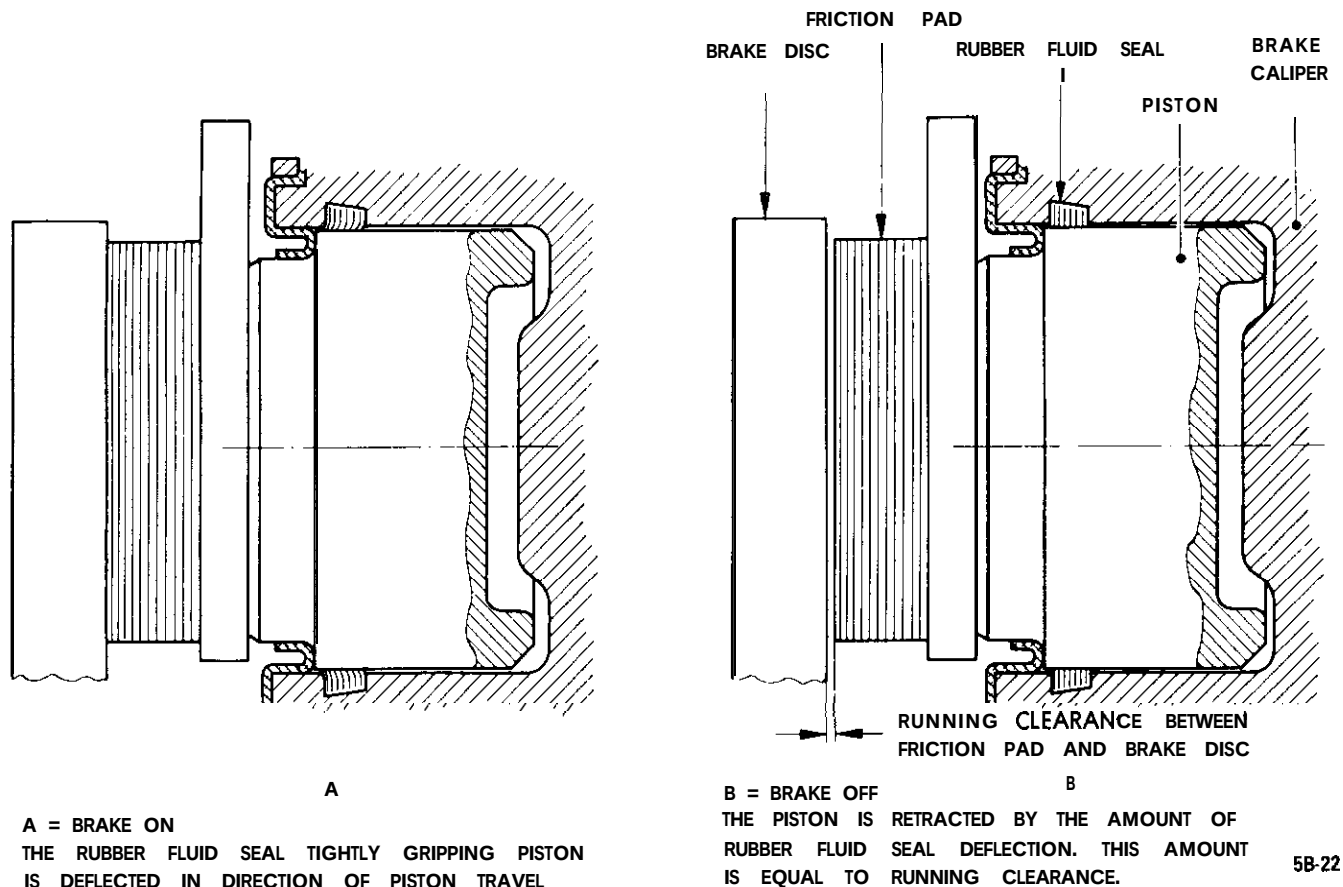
B-22 Rubber Fluid Seal -Automatic Piston Retraction
